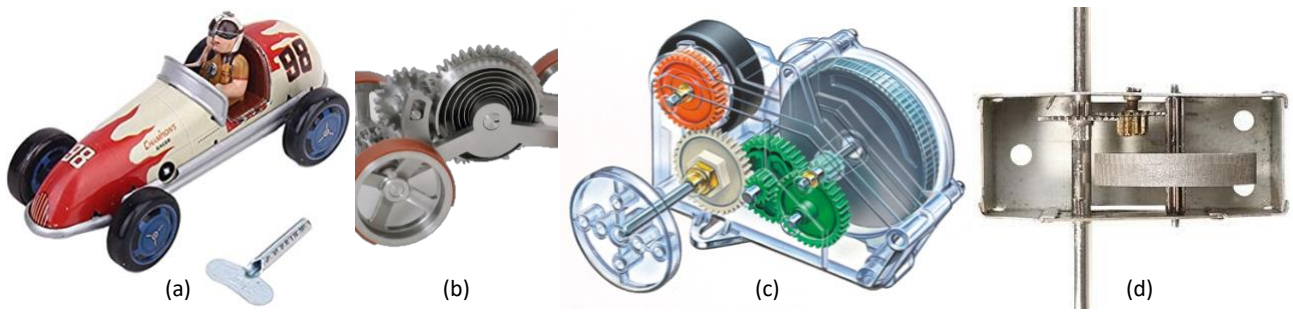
(a) Wind-Up Motor (b) Pullback Motor (c) Complex Friction Motor (d) Simple Friction Motor
